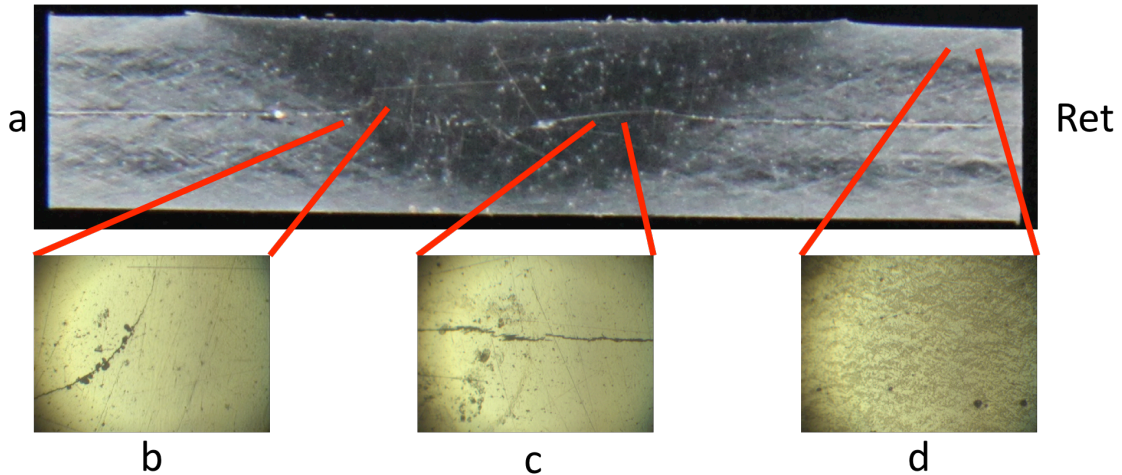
Weld 7: 18 ipm 2000 rpm 87% parent UTS, a) 1x image of weld zone, b) 10x view of the observed hooking defect (advancing), c) 10x view of joint line remnant within the weld zone d) 10x view of parent material
